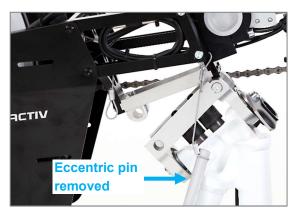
Eccentric pin removed from the adapter plate, chassis lowered to the ground
